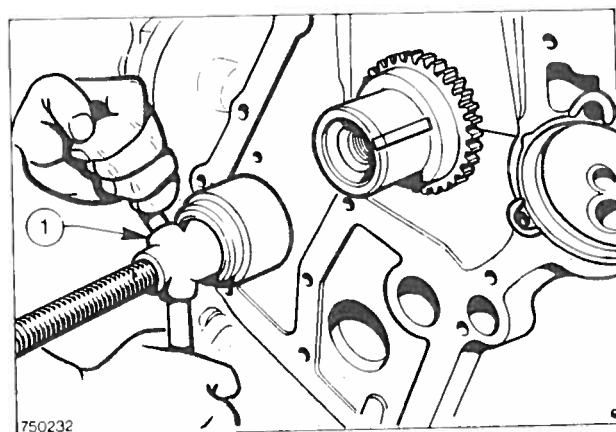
Removing/replacing the camshaft bearings working from the front of the engine.
